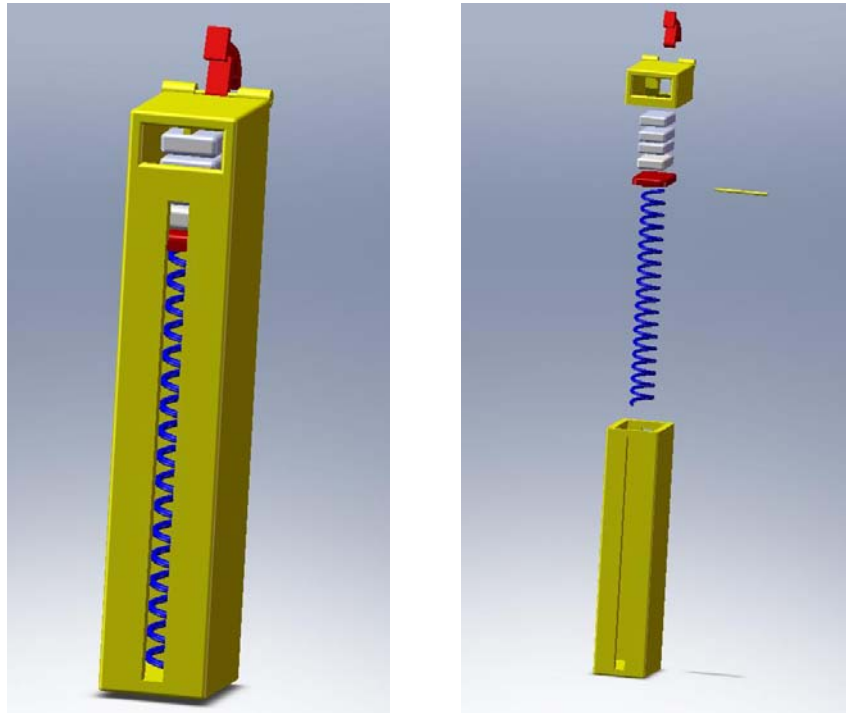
& 12 – The above figures illustrate our new reusable hard shell gum dispenser. Based on the PEZ dispenser, our container holds 12 pieces of hard shell gum and uses a pin-joint hammer mechanism to dispense of the gum.
